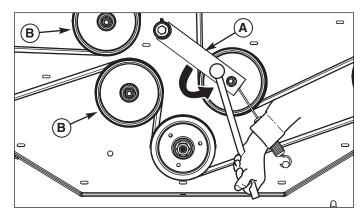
Mower PTO Belt A. Spring-loaded Idler B. Stationary Idler Pulley
